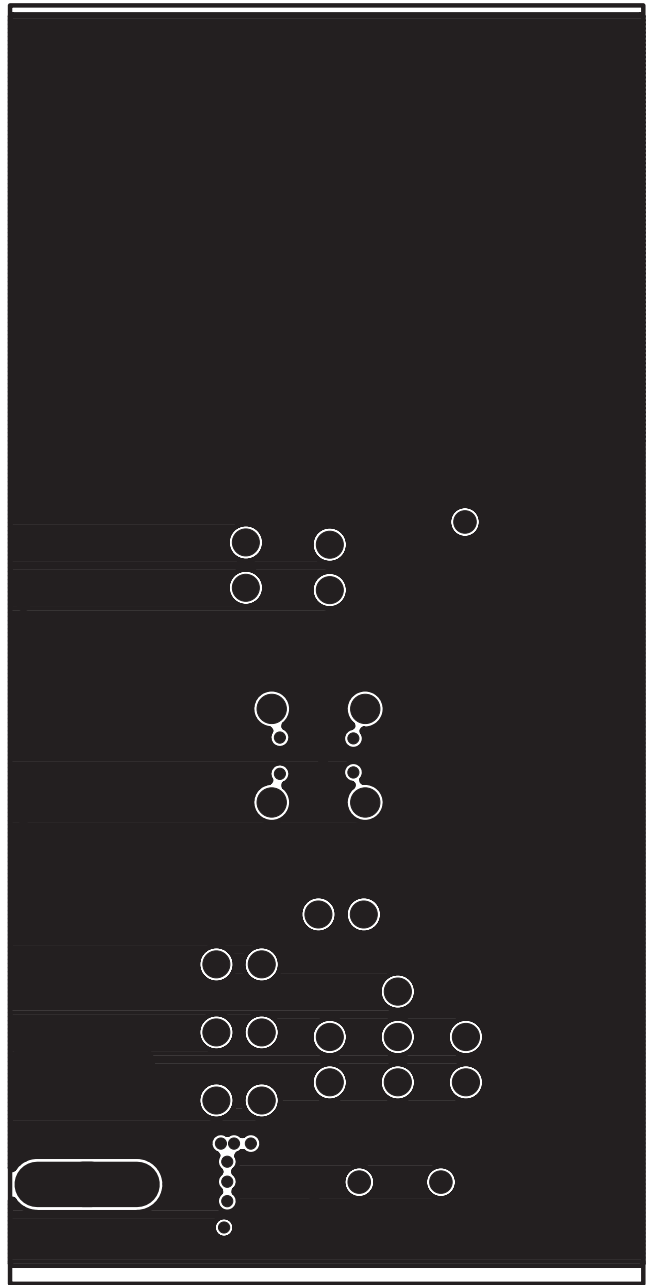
MAX3748H EV Kit PCB Layout—Ground Plane (2X)
